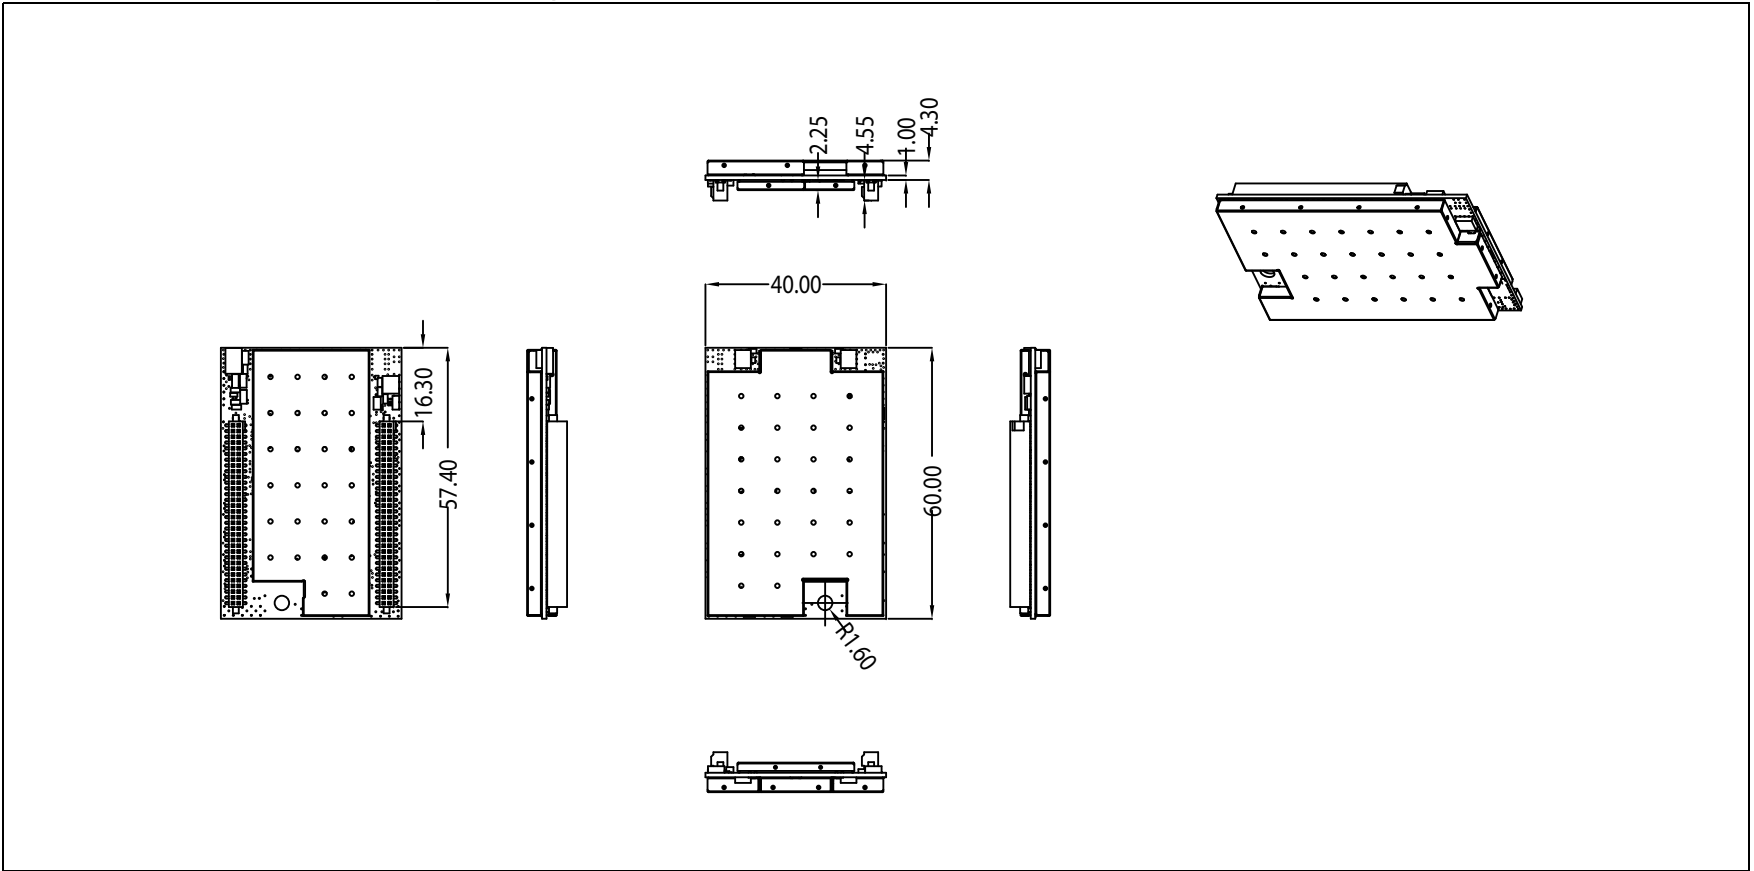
CY920 BOARD DIMENSIONS (BOTTOM VIEW)
